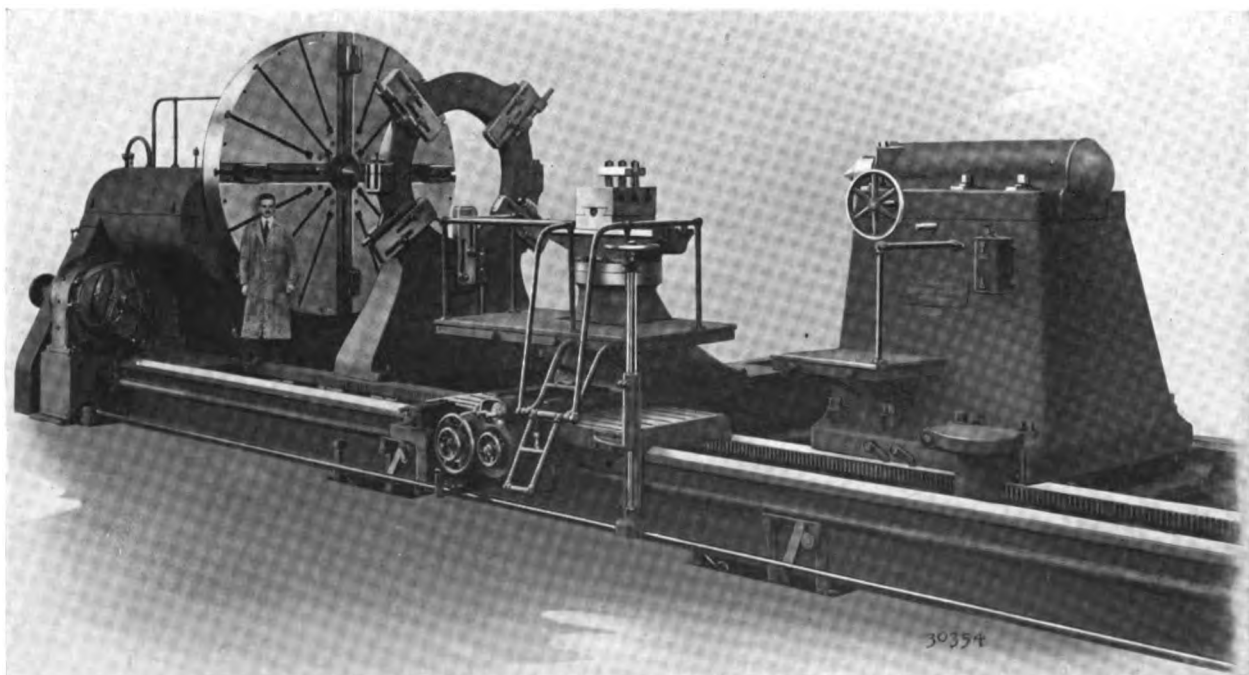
168-Inch (4267 mm.) Heavy Engine Lathe
